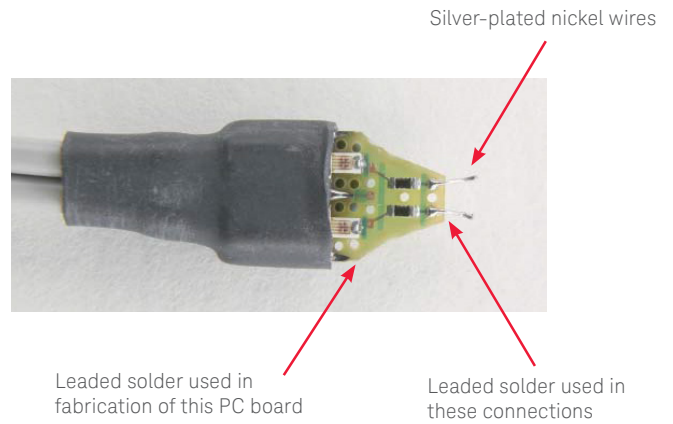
N5381A 12-GHz InfiniiMax solder-in probe head
